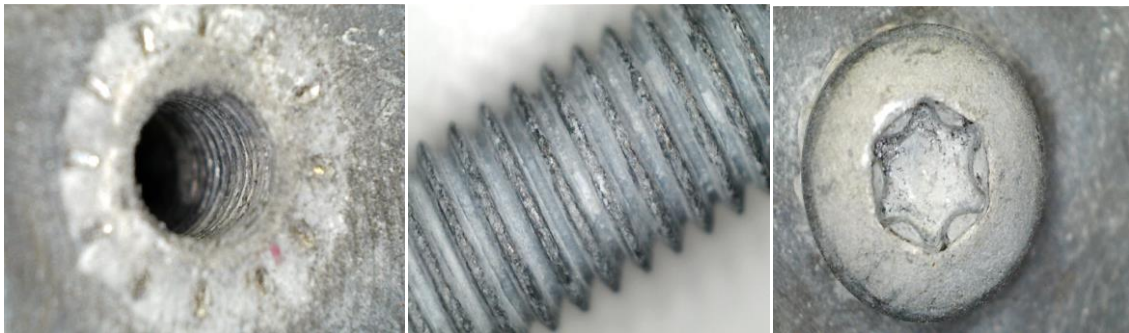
SUS304 Zintek 200, thread and head of the screw after salt fog test
